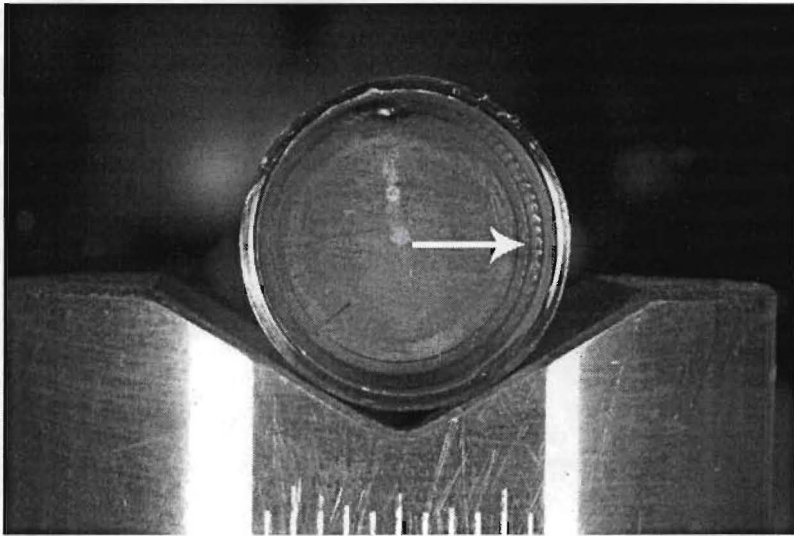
The interior of the strength member showing the lid and interior weld surface. Arrow indicates the interior weld surface which will be examined by SEM.
